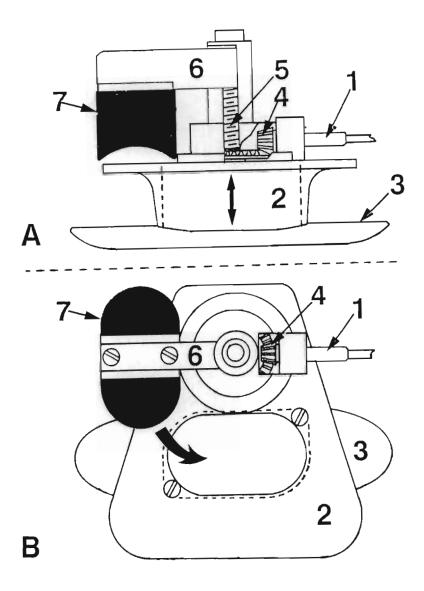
Remote controlled plunger: (A) side view, (B) plan view; (1) drive shaft with flexible extension to reversible motor, (2) cannula and baseplate, (3) sleeve, (4) bevelled reduction gears, (5) feed-screw operating plunger, (6) plunger arm, (7) plunger. Construction material: poly oxymethylene.
